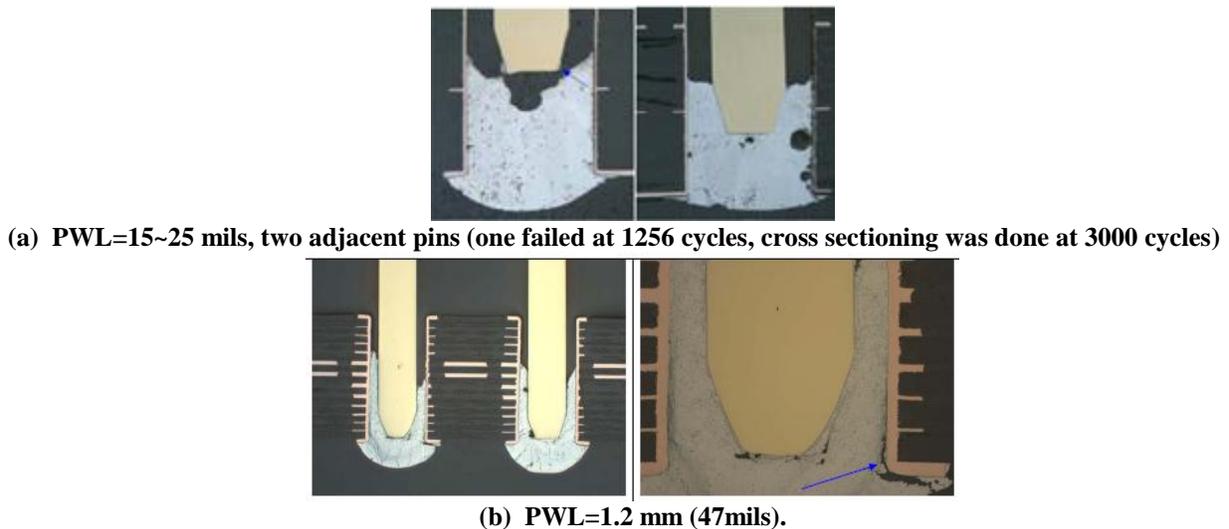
PTH solder joint failures (a) and non failure (b). Note: board thickness=2.4 mm (94 mils) and no pin protrusion,
